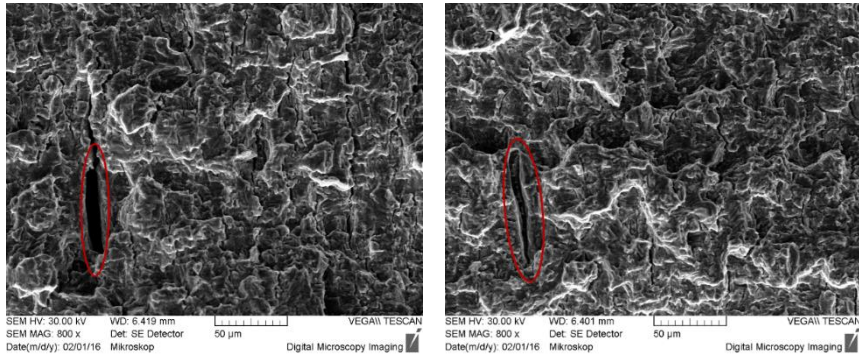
Occasional voids/inclusions on the fracture surface (Specimen VII)
